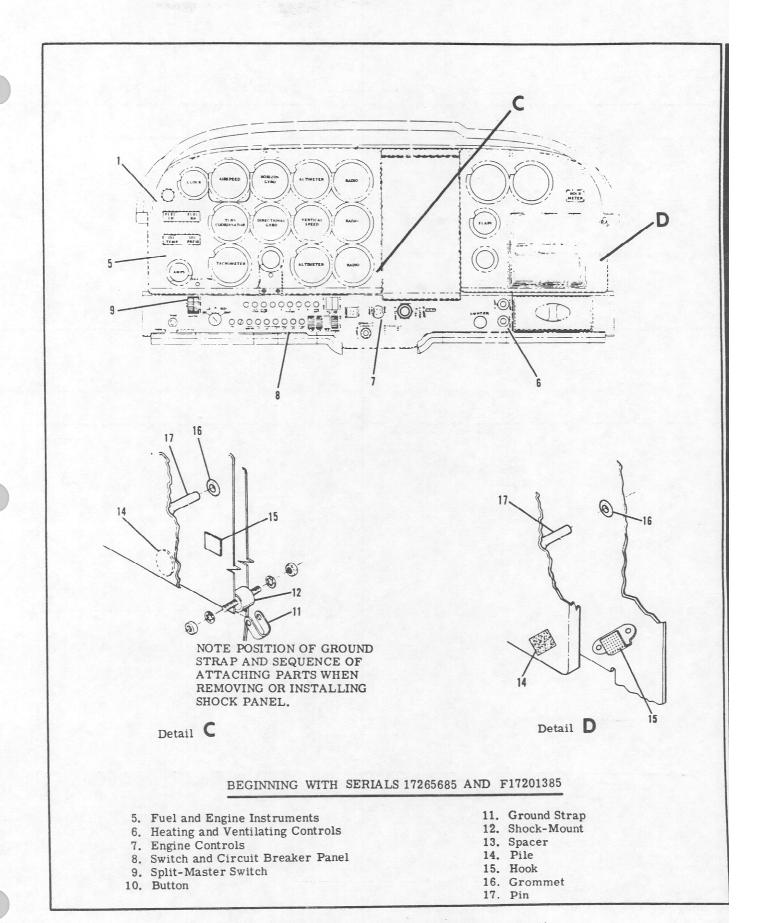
Typical Instrument Panel (Sheet 2 of 2)
